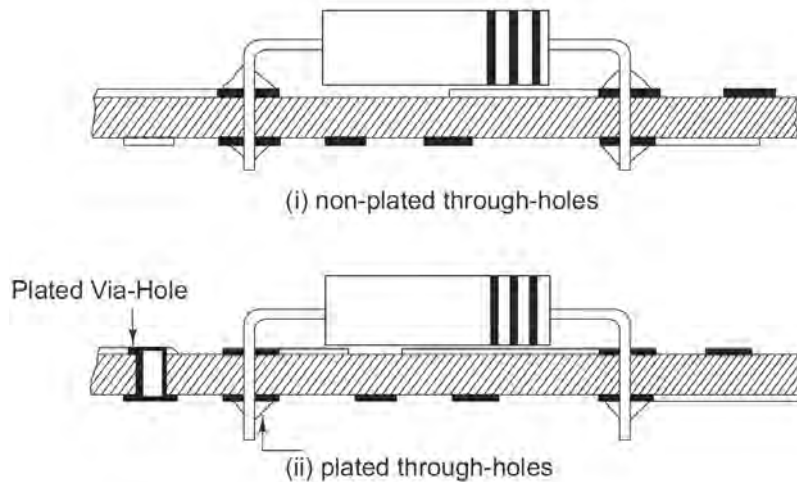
Constructional details of double-sided boards with plated through-hole connection (PTH) and without plated through-hole connection (non-PTH).<sup>[22]</sup>
